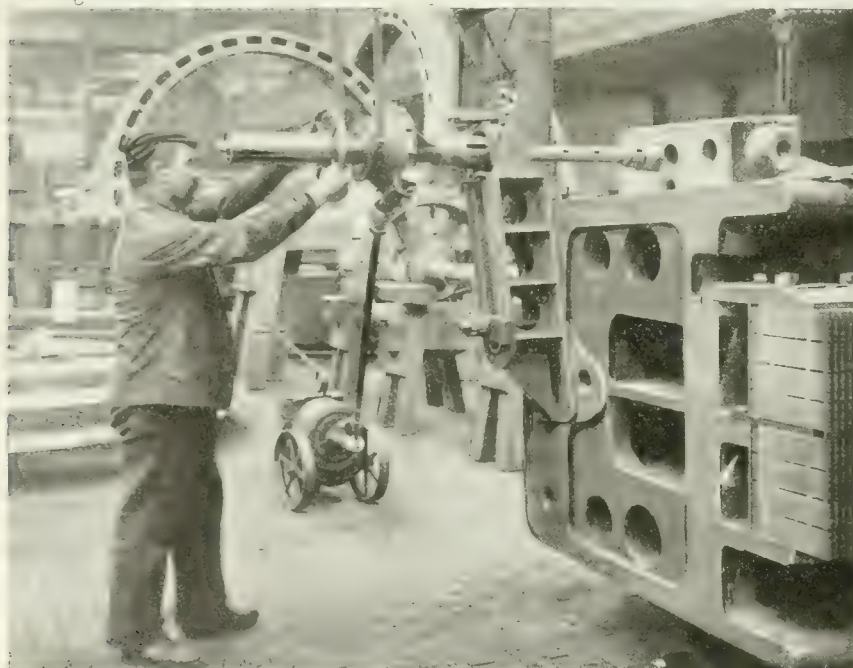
GERMAN PORTABLE TOOL HEAD, WITH TELESCOPE SHAFT OPERATED BY ELECTRIC MOTOR.
